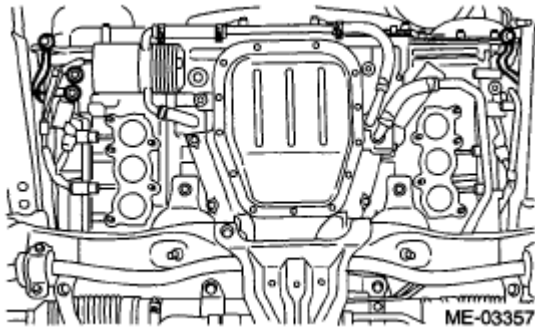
Identifying Ground Cable To Chain Cover Lower (Left And Right)
